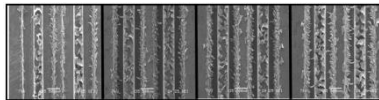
b: From lift, top burr formation for (3000, 2500, 2000 and 1500 rpm) spindle speed at 1 mm/min speed and 400 μm tool diameter.
